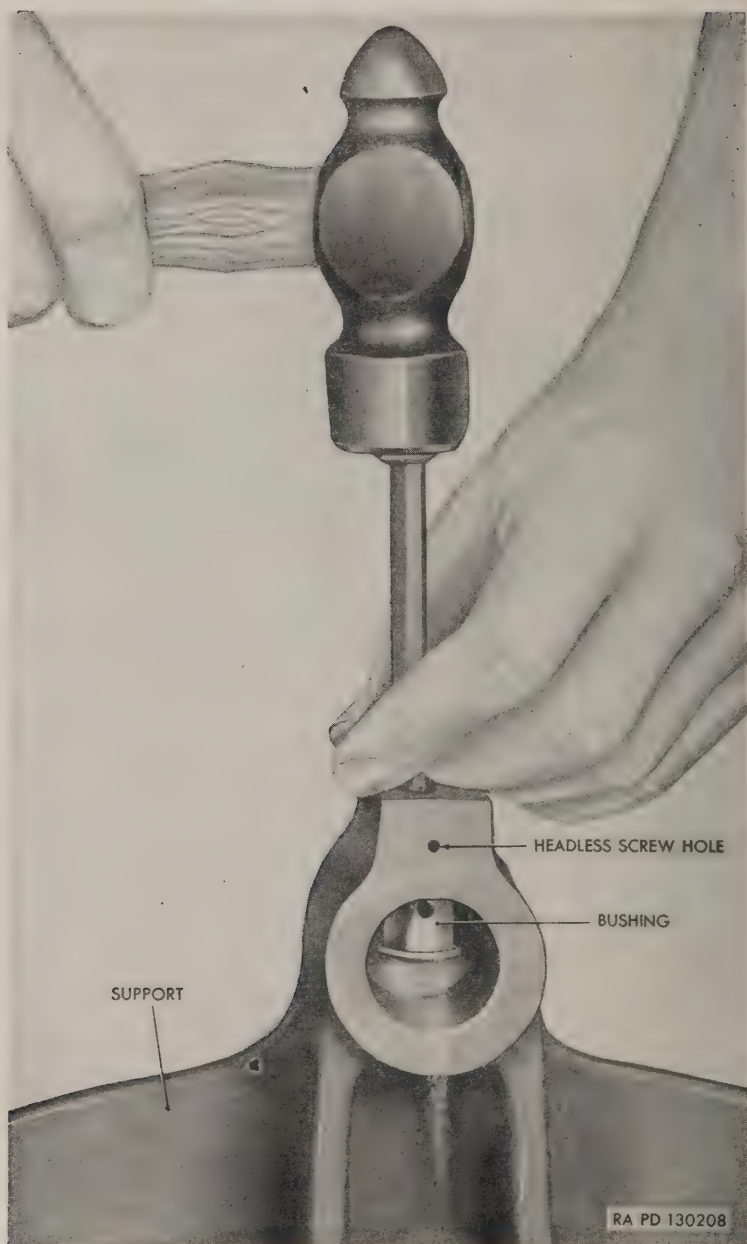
Driving bushing from leg socket of support—plotting boards M5 and M5A2.
